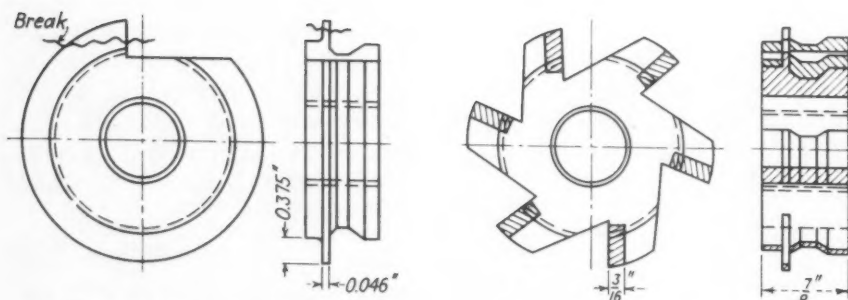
Six-tipped circular form tool used to replace a solid H.S.S. form tool that frequently broke as shown by the ragged line.
